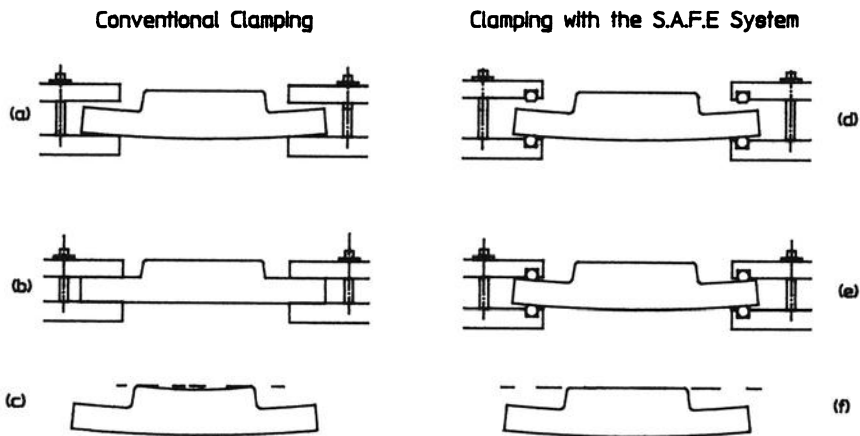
Modular tooling system with self-adjusting fixturing elements [4] (courtesy of S.A.F.E system)
